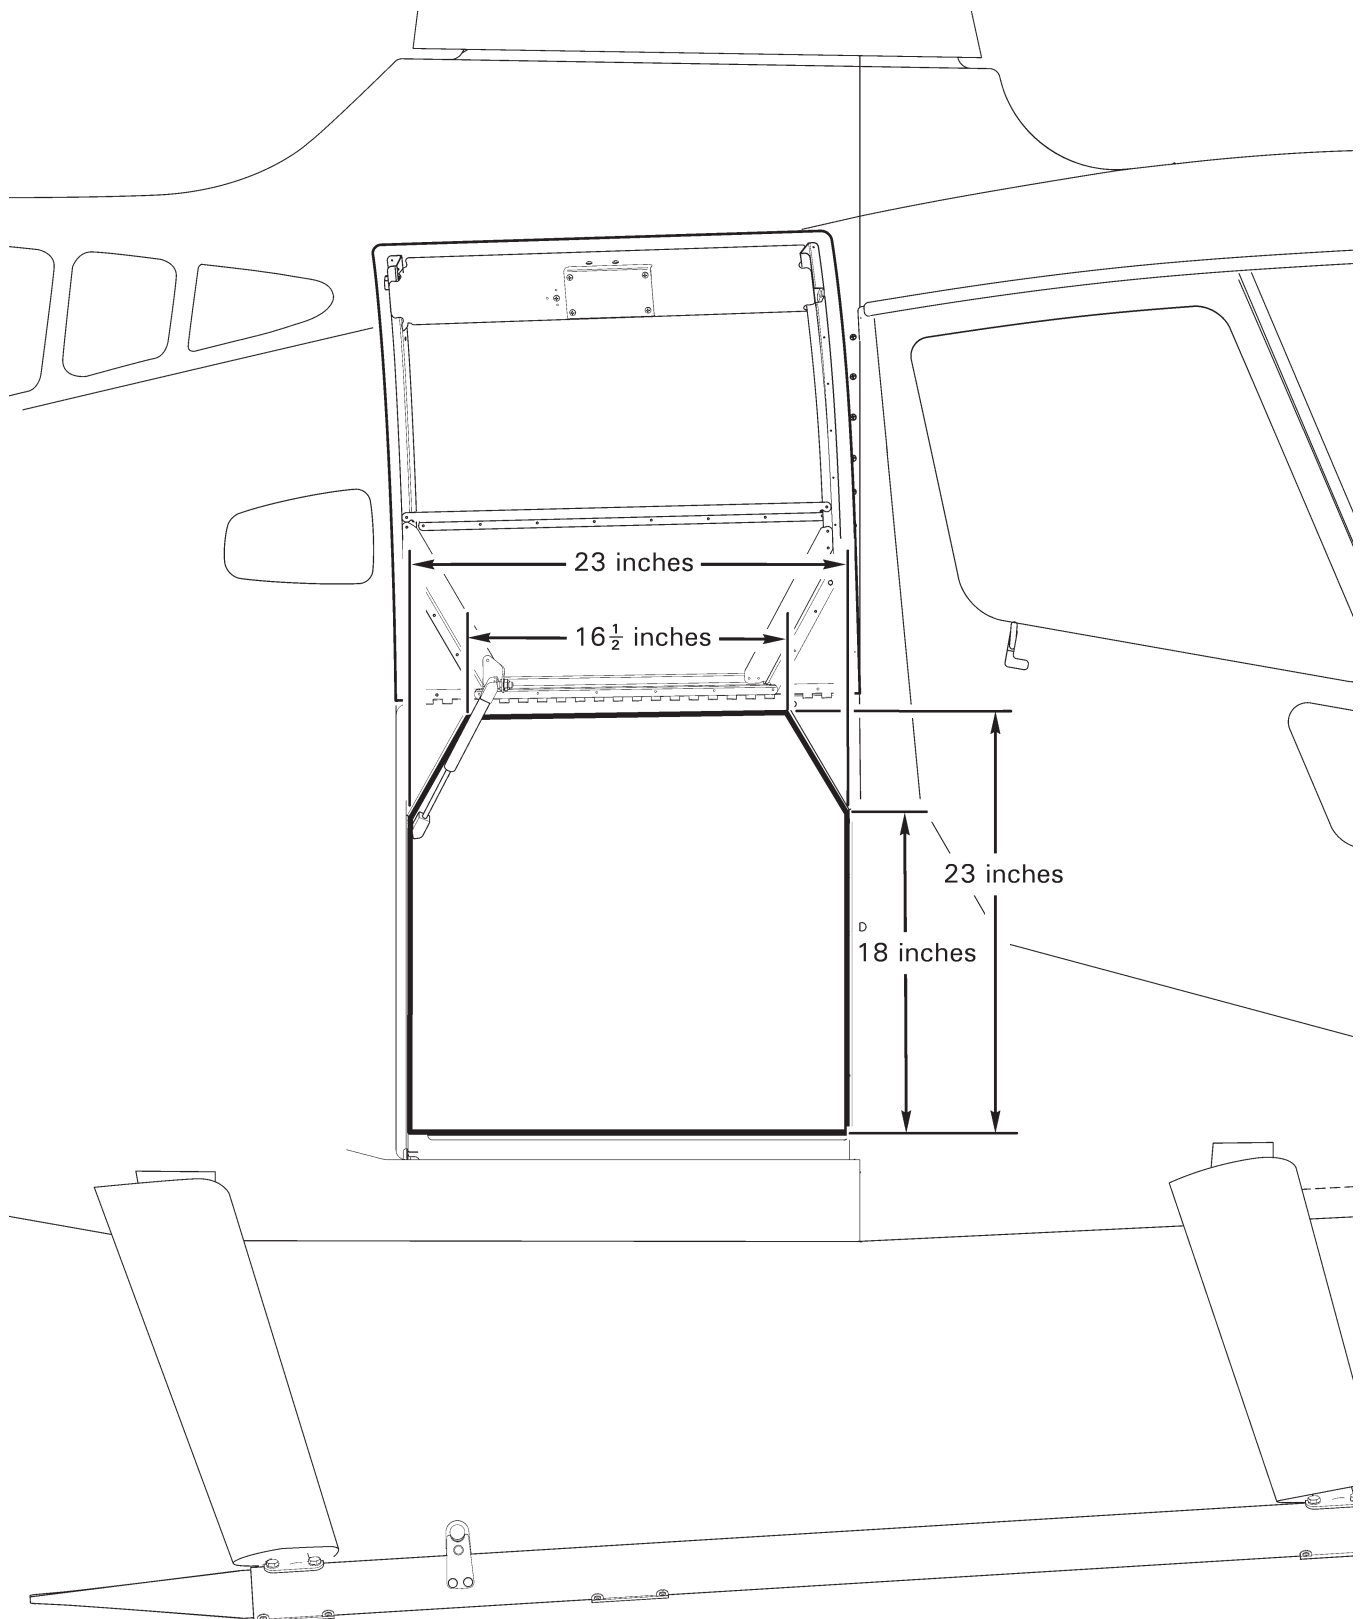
BAGGAGE COMPARTMENT ACCESS DIMENSIONS
